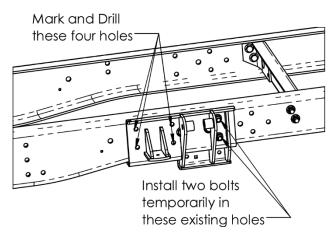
Location of Drilling Template on Driver Side of Frame (Air Ride Conversion)
